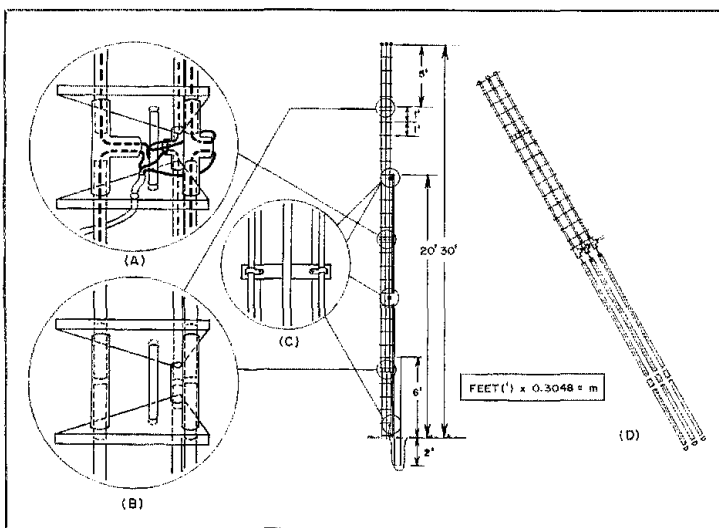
This drawing shows some essential details of poly-tower construction. At A, the joining of the dipole wires. Structural strengthening details are shown at B. The electrical conduit fasteners and cross-bracing is evident at C. Basic assembly of the poly-tower legs and dipole wires is shown at D and described in the text.
